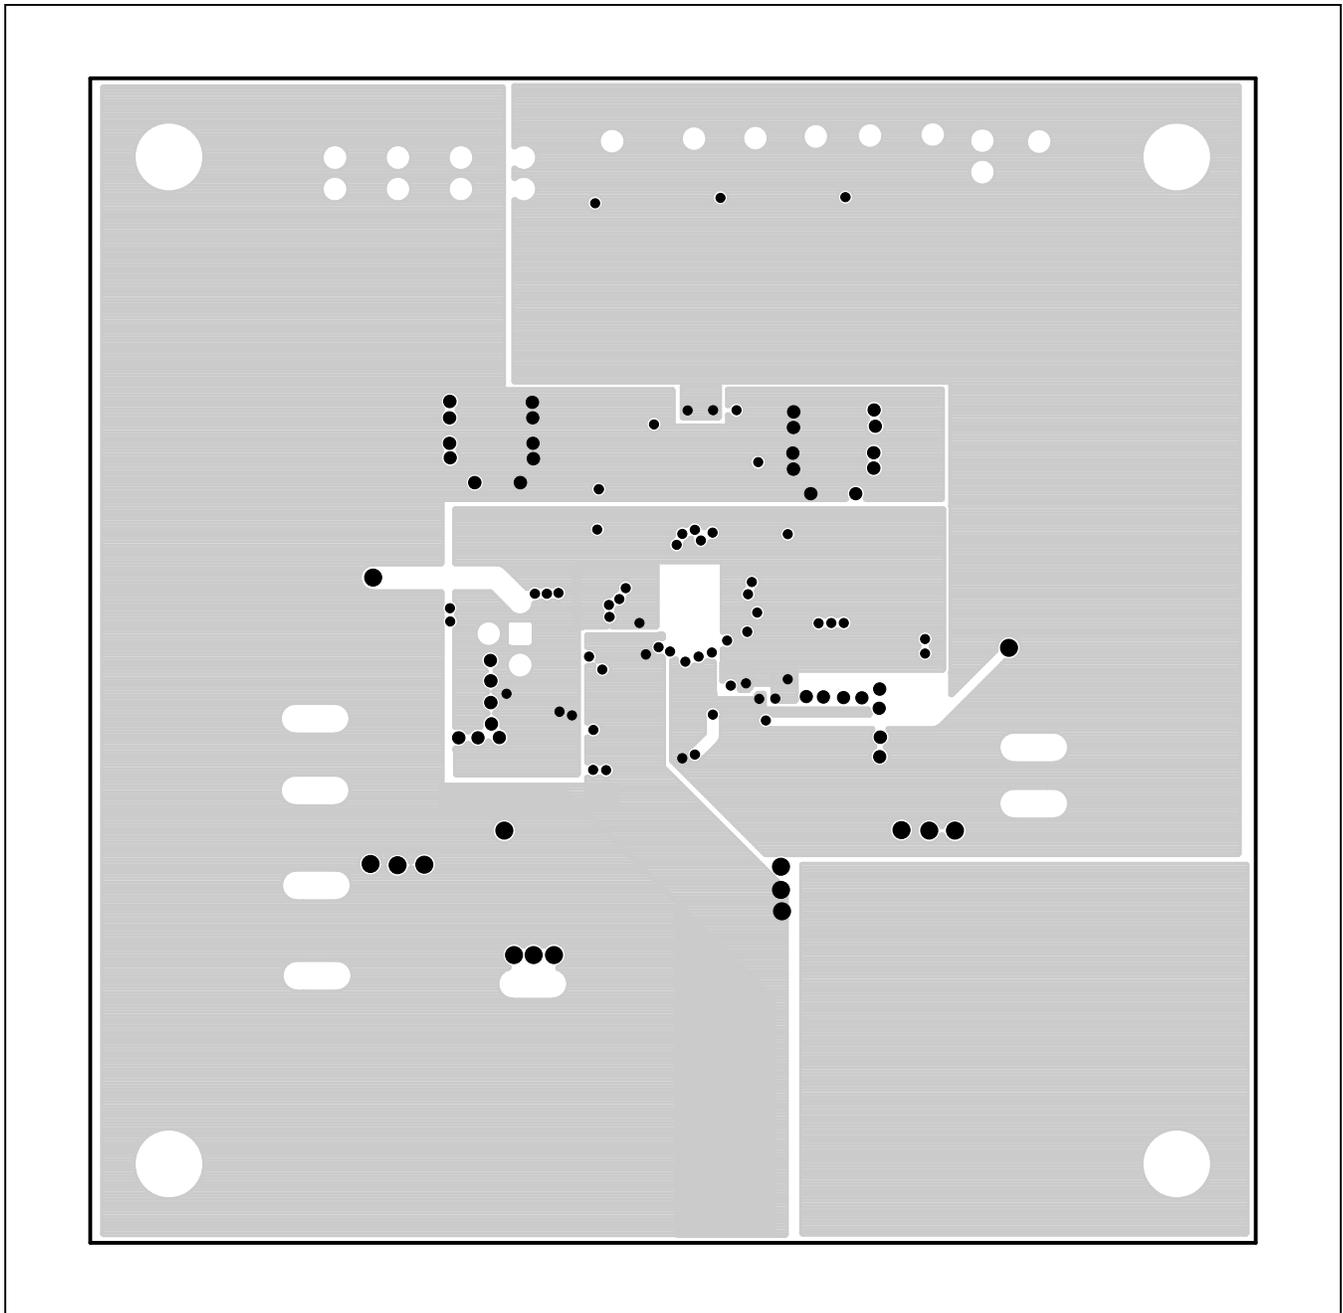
MAX16930 EV Kit PCB Layout—Layer 3 (VIN and AGND)
